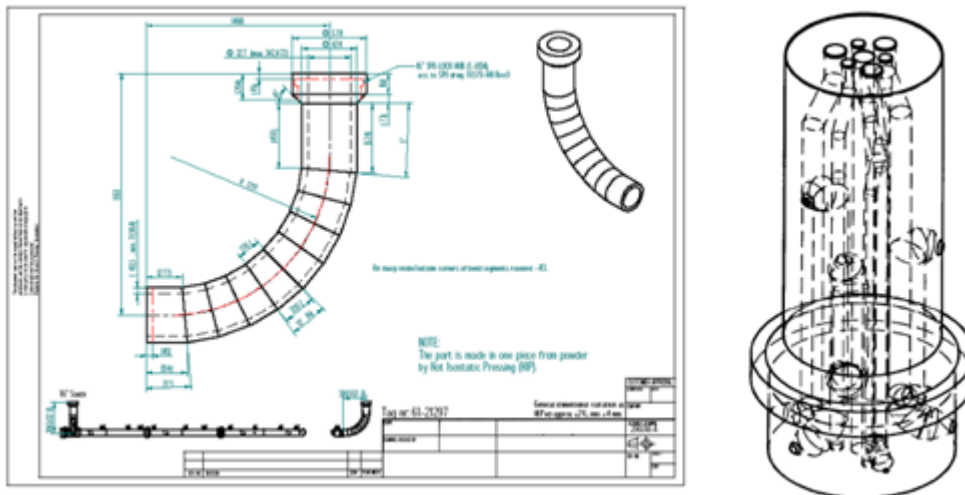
Left: a HIP project drawing example, right: a swivel drawing showing internal elbows and holes.
